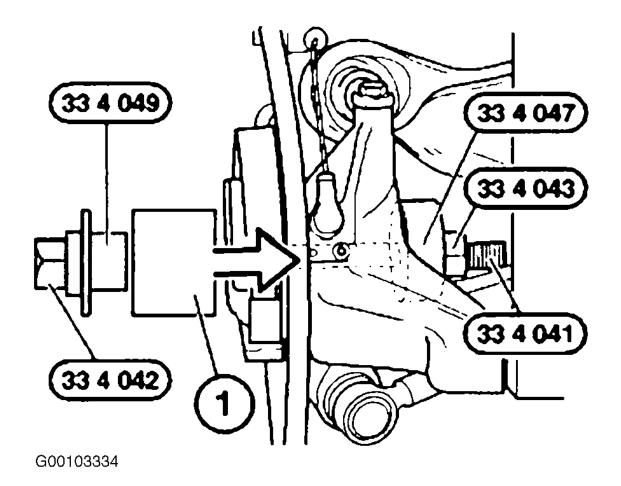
Pulling In New Wheel Bearing Courtesy of BMW OF NORTH AMERICA, INC.
